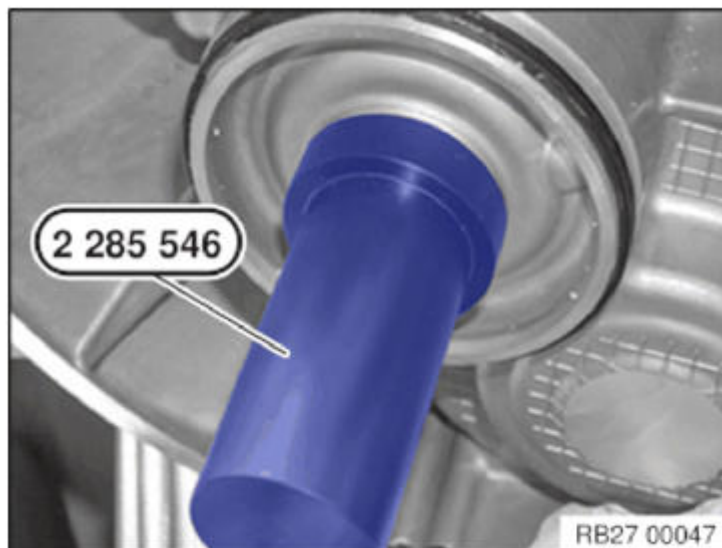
Pushing Radial Shaft Seal Onto Guide Sleeve Of Special Tool (2 285 546)
